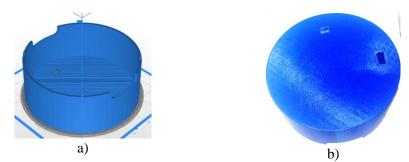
a) Part presentation on the printer, b) Physically produced top casing (finished product)
